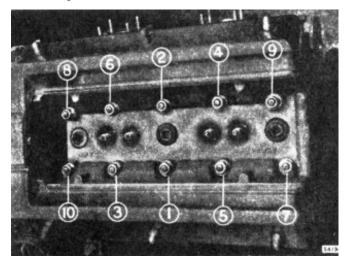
The correct order of tightening and slackening the cylinder head nuts
